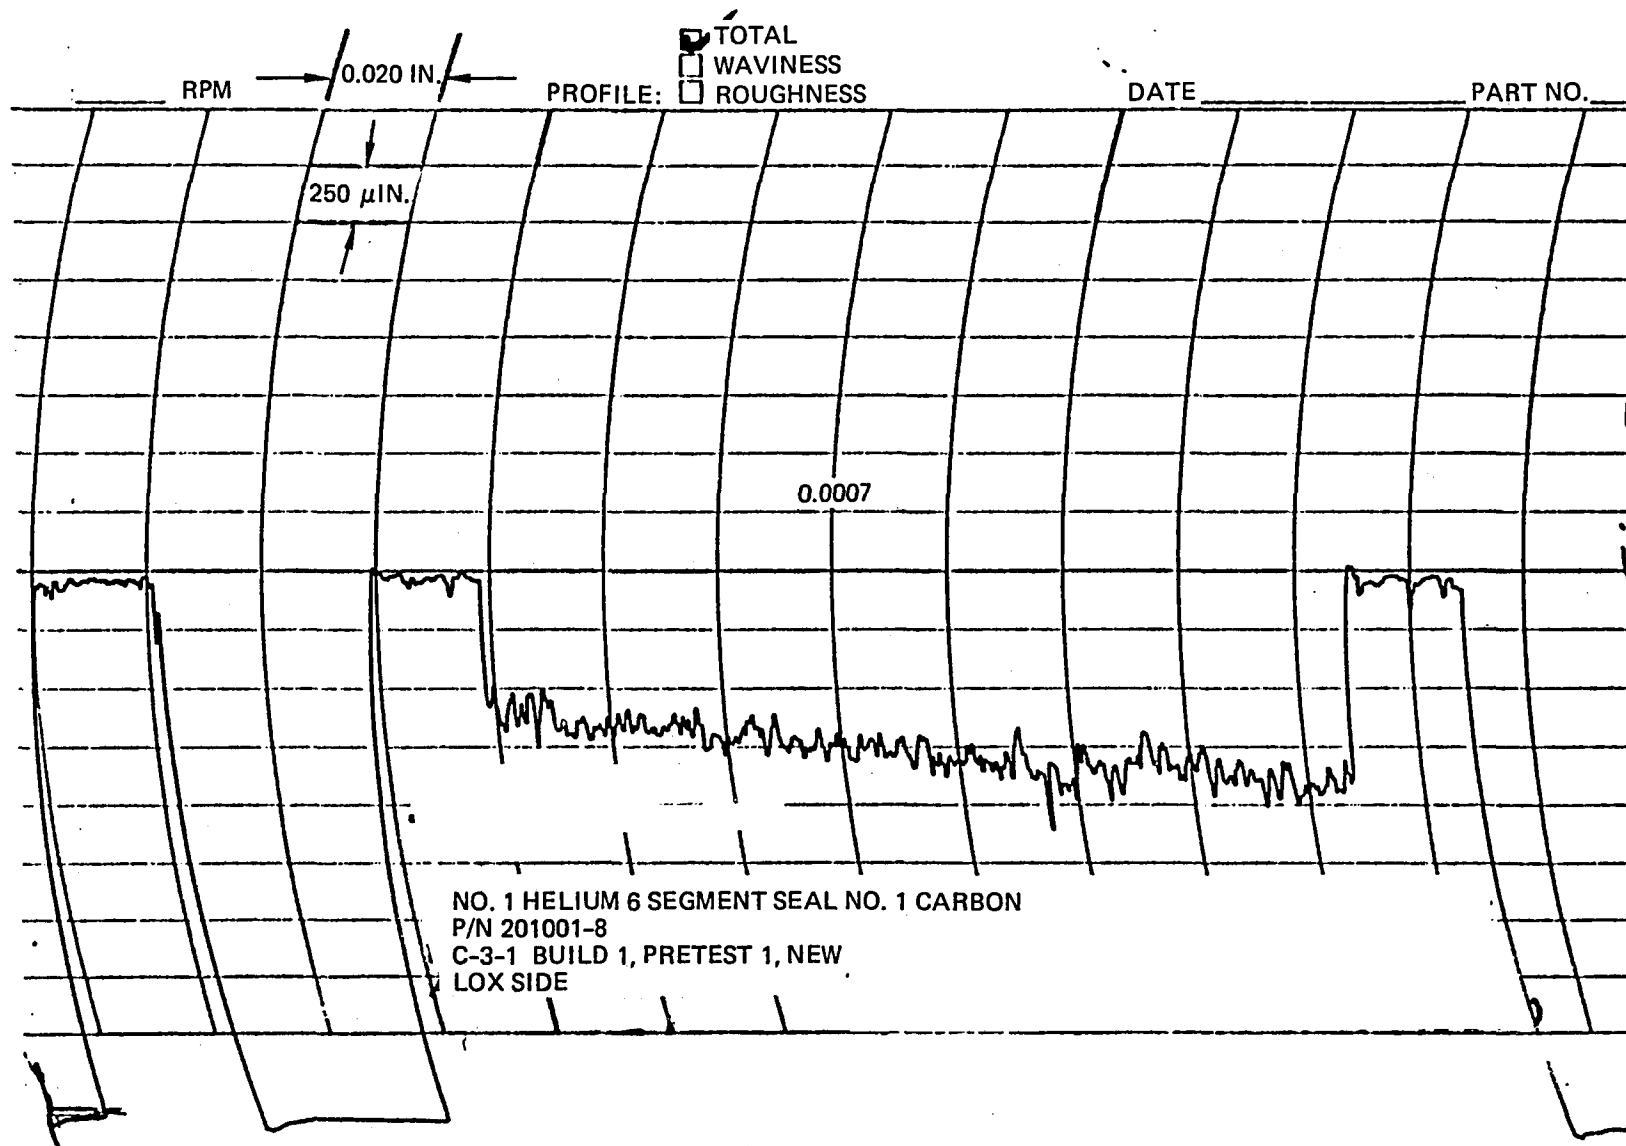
Typical Surface Profile Trace of LOX Side Helium Seal Segment C-3-1 (New), Pretest 1, Build 1
